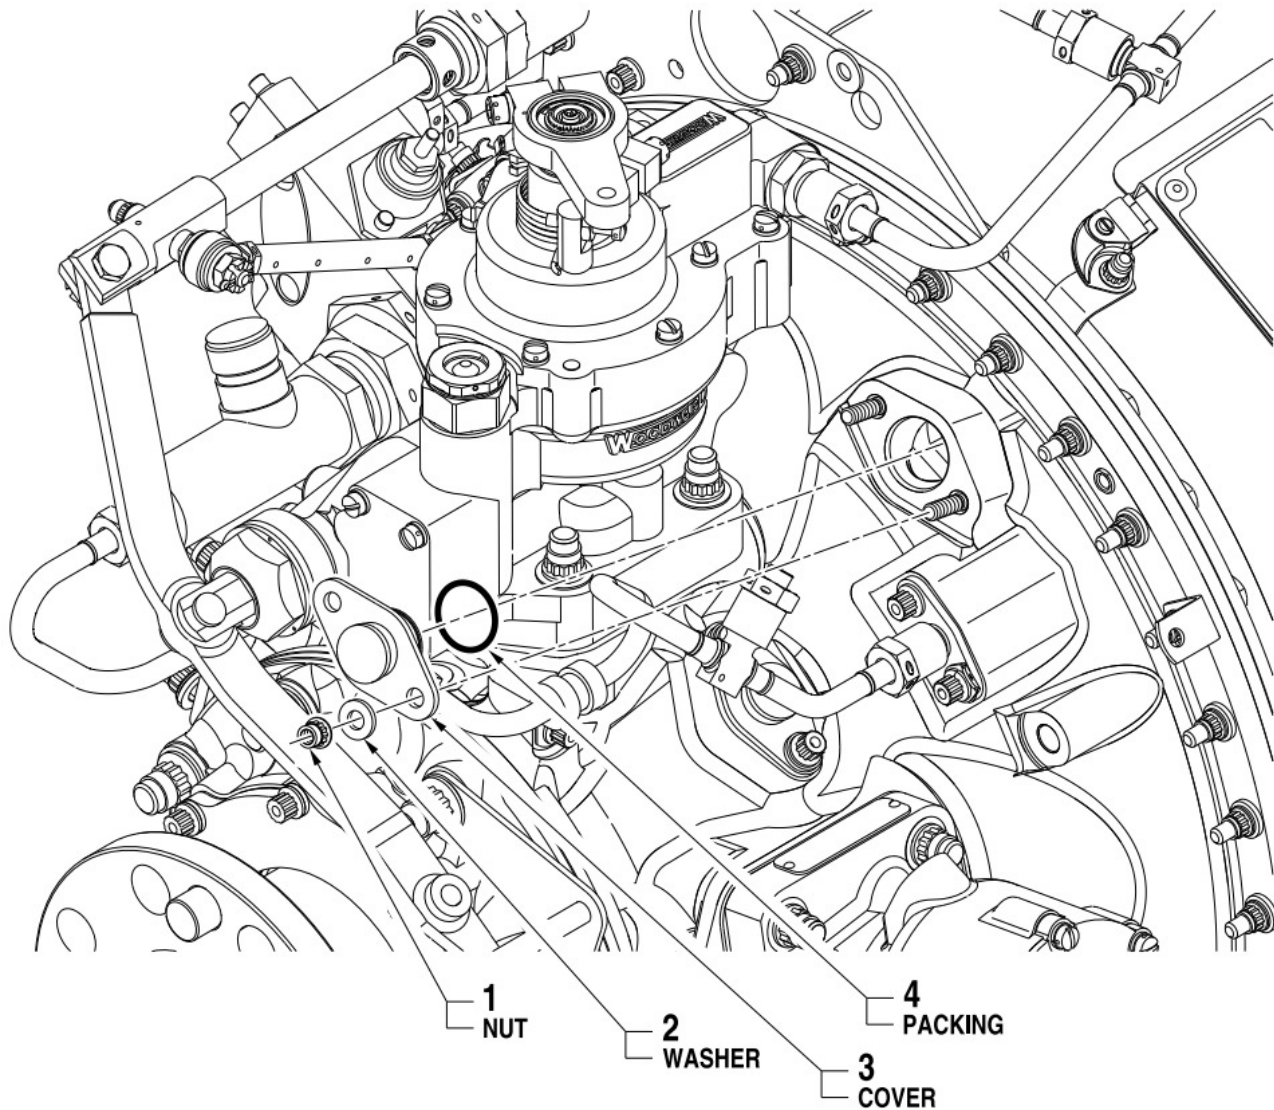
RGB and AGB Borescope Access Ports (Task 72-00-00-280-803)
